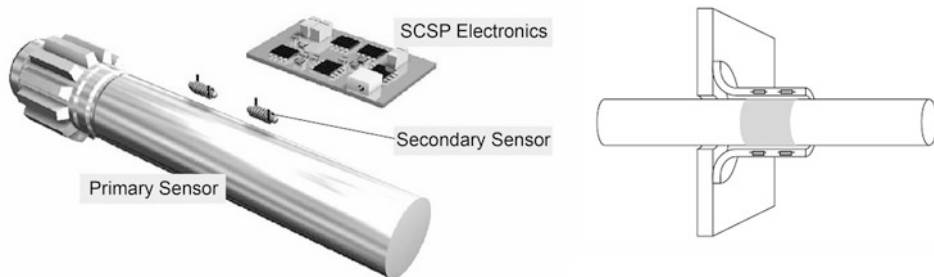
Torque sensor based on induction (a) sensor system, (b) torque sensor for a gear shaft (Factory photo: NCT Engineering)
